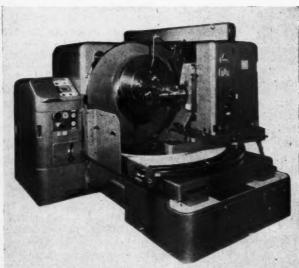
This spiral bevel and hypoid gear generating machine, built by the Modul factory in Karl-Marx-Stadt, is designed for roughing operations, and is one of six machines in which the same basic elements are employed
